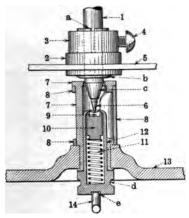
Sectional View of Visual Bearing and Threadless Jewel POST OF DUNCAN METER.
